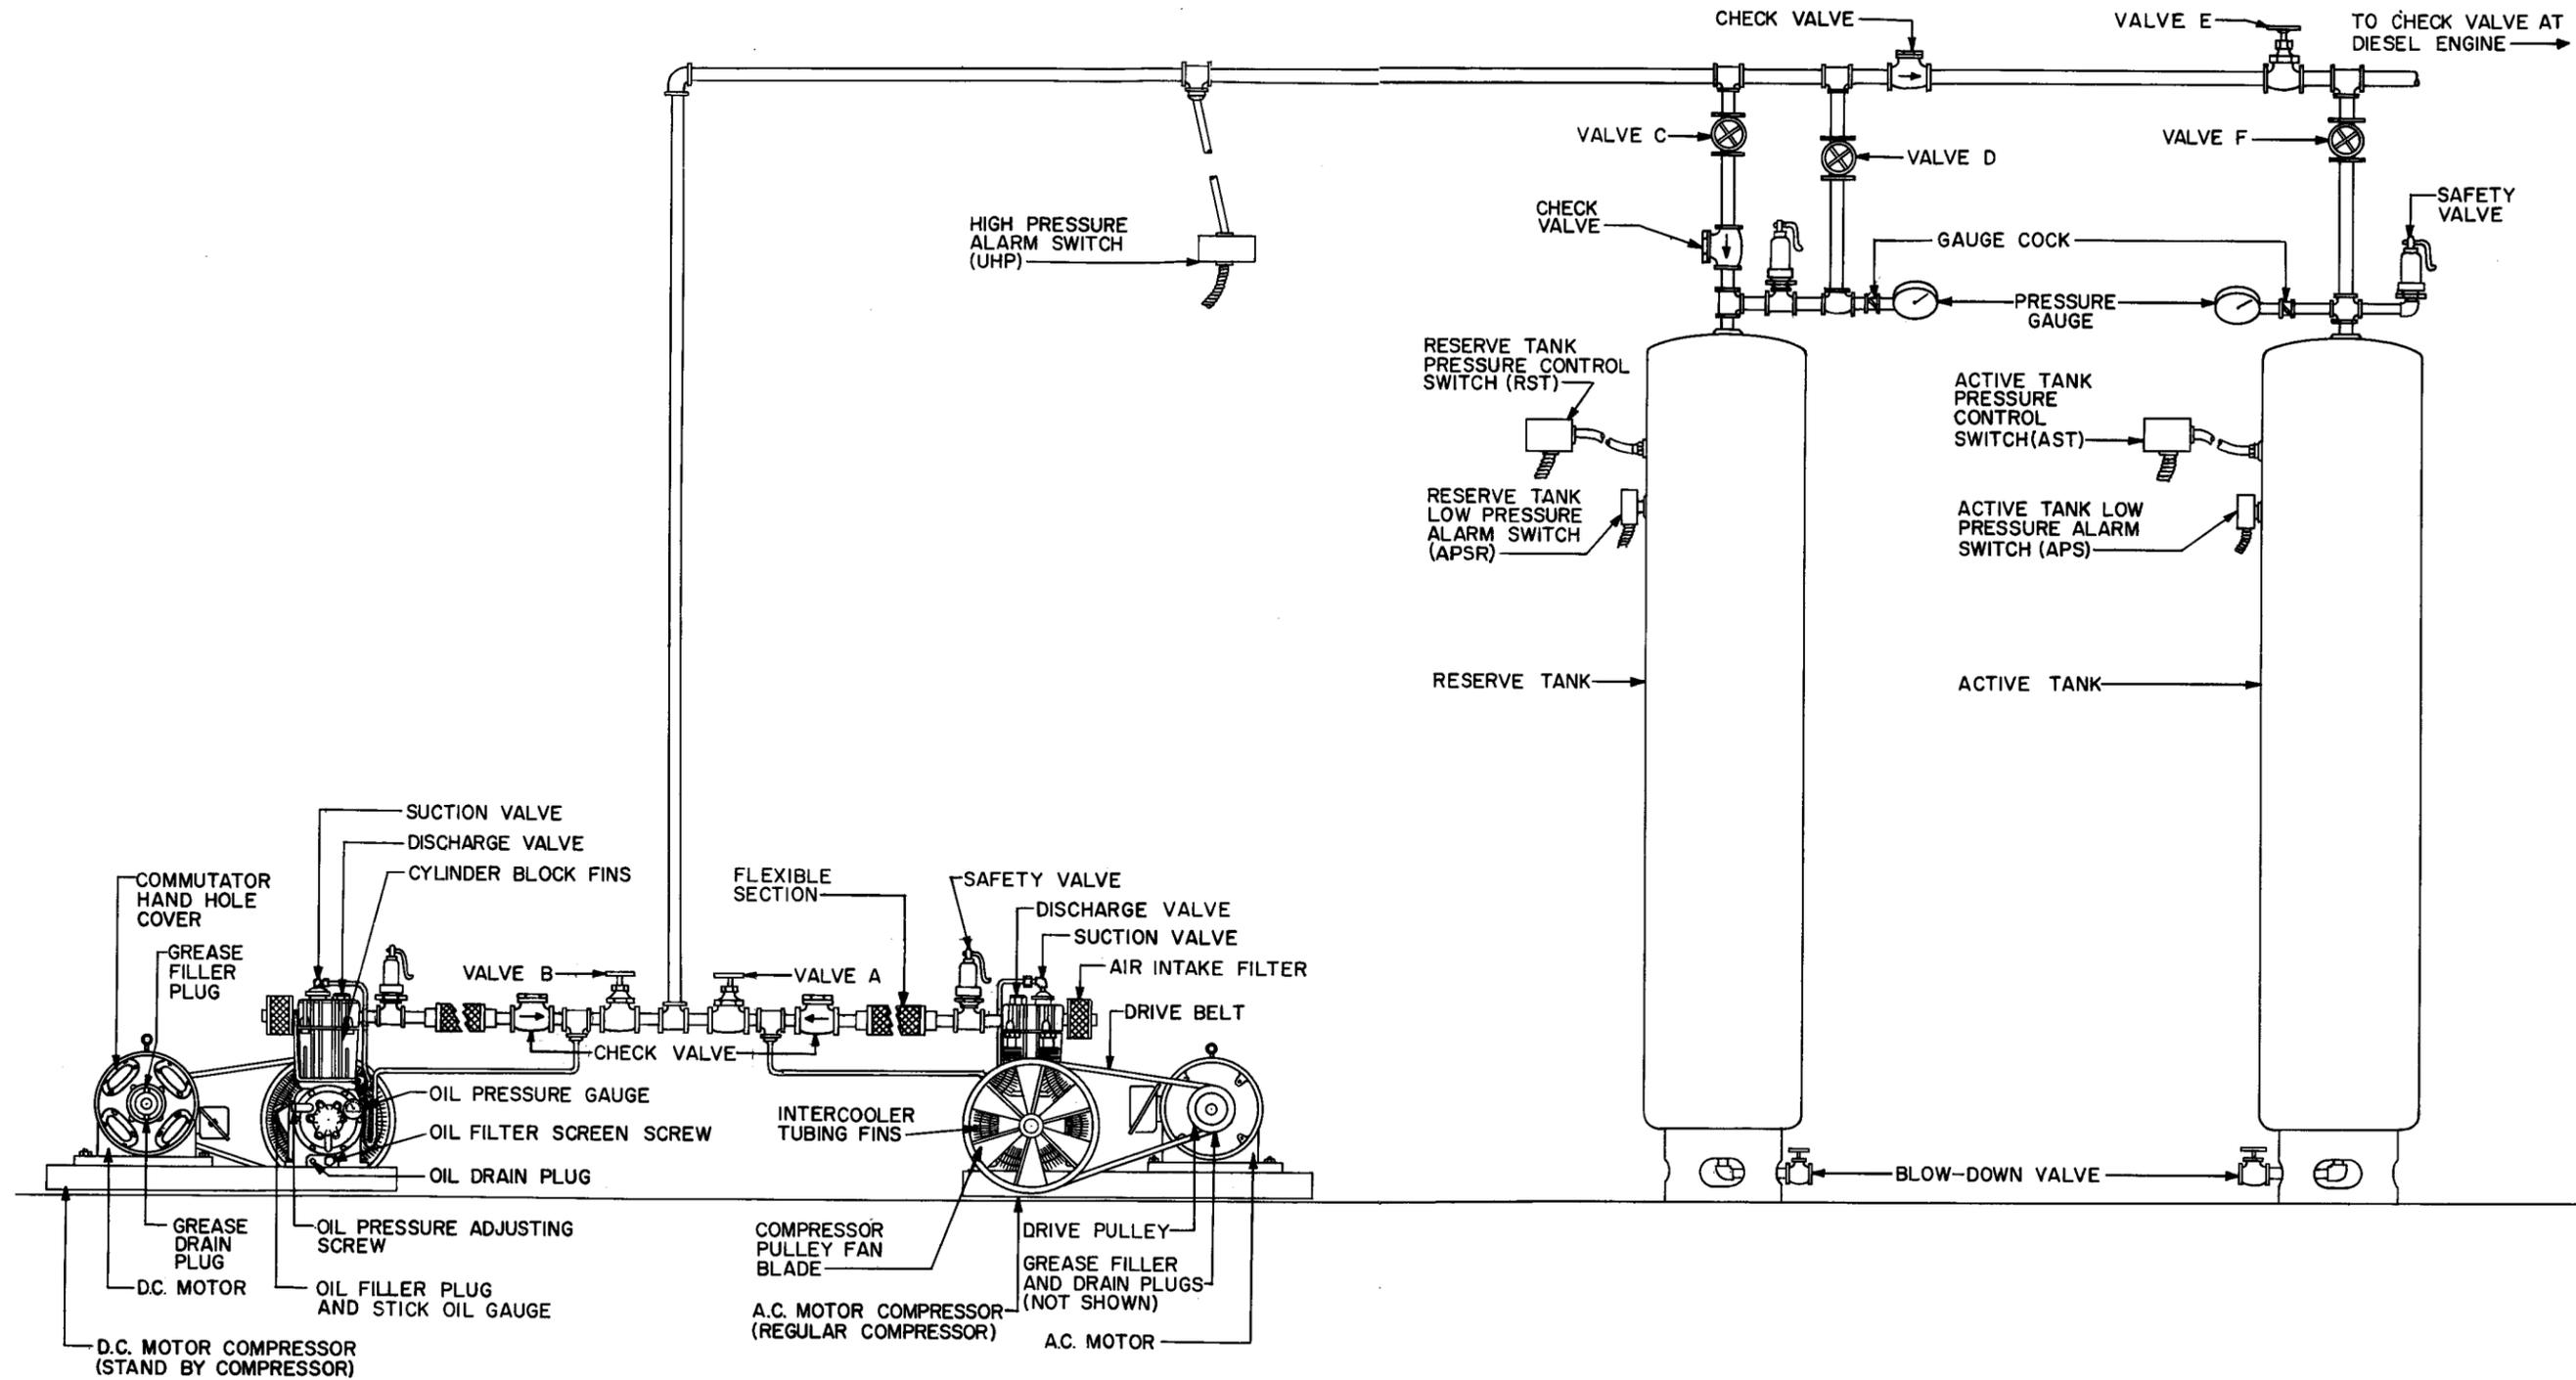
Air-Starting Equipment - AC and DC Motor Air Compressors and Associated Tanks (KS-15777, L51 air-starting equipment shown)
